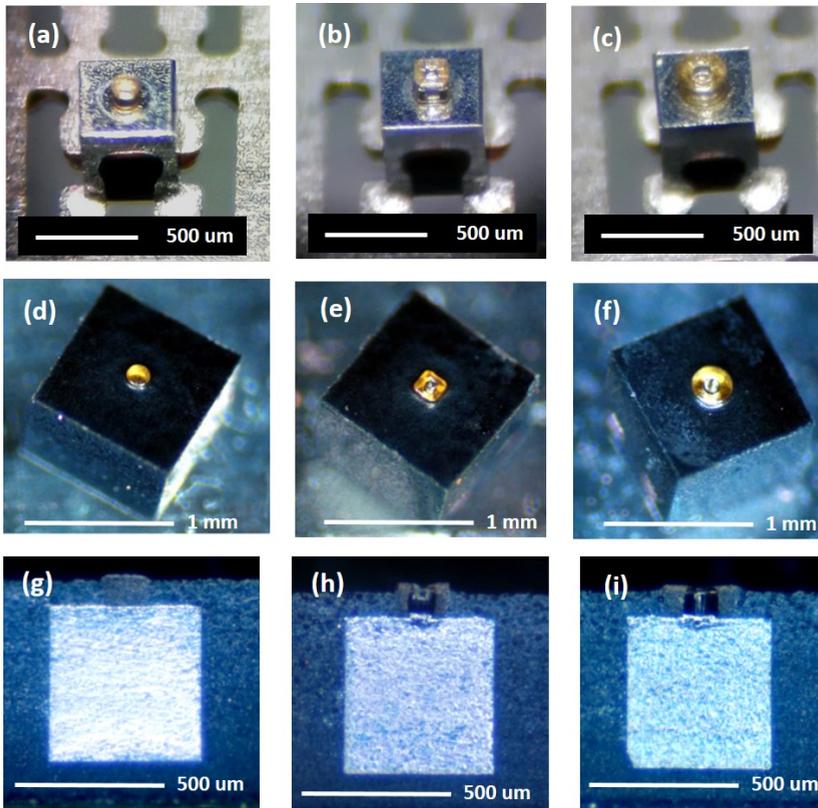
The results of assembly and molding process in TPVH-W-QFN. Images of the fabricated TPV dies (a-c), the molded 1x1 QFN packages with TPV through-hole (d-f) and the cross section of the molded package.
